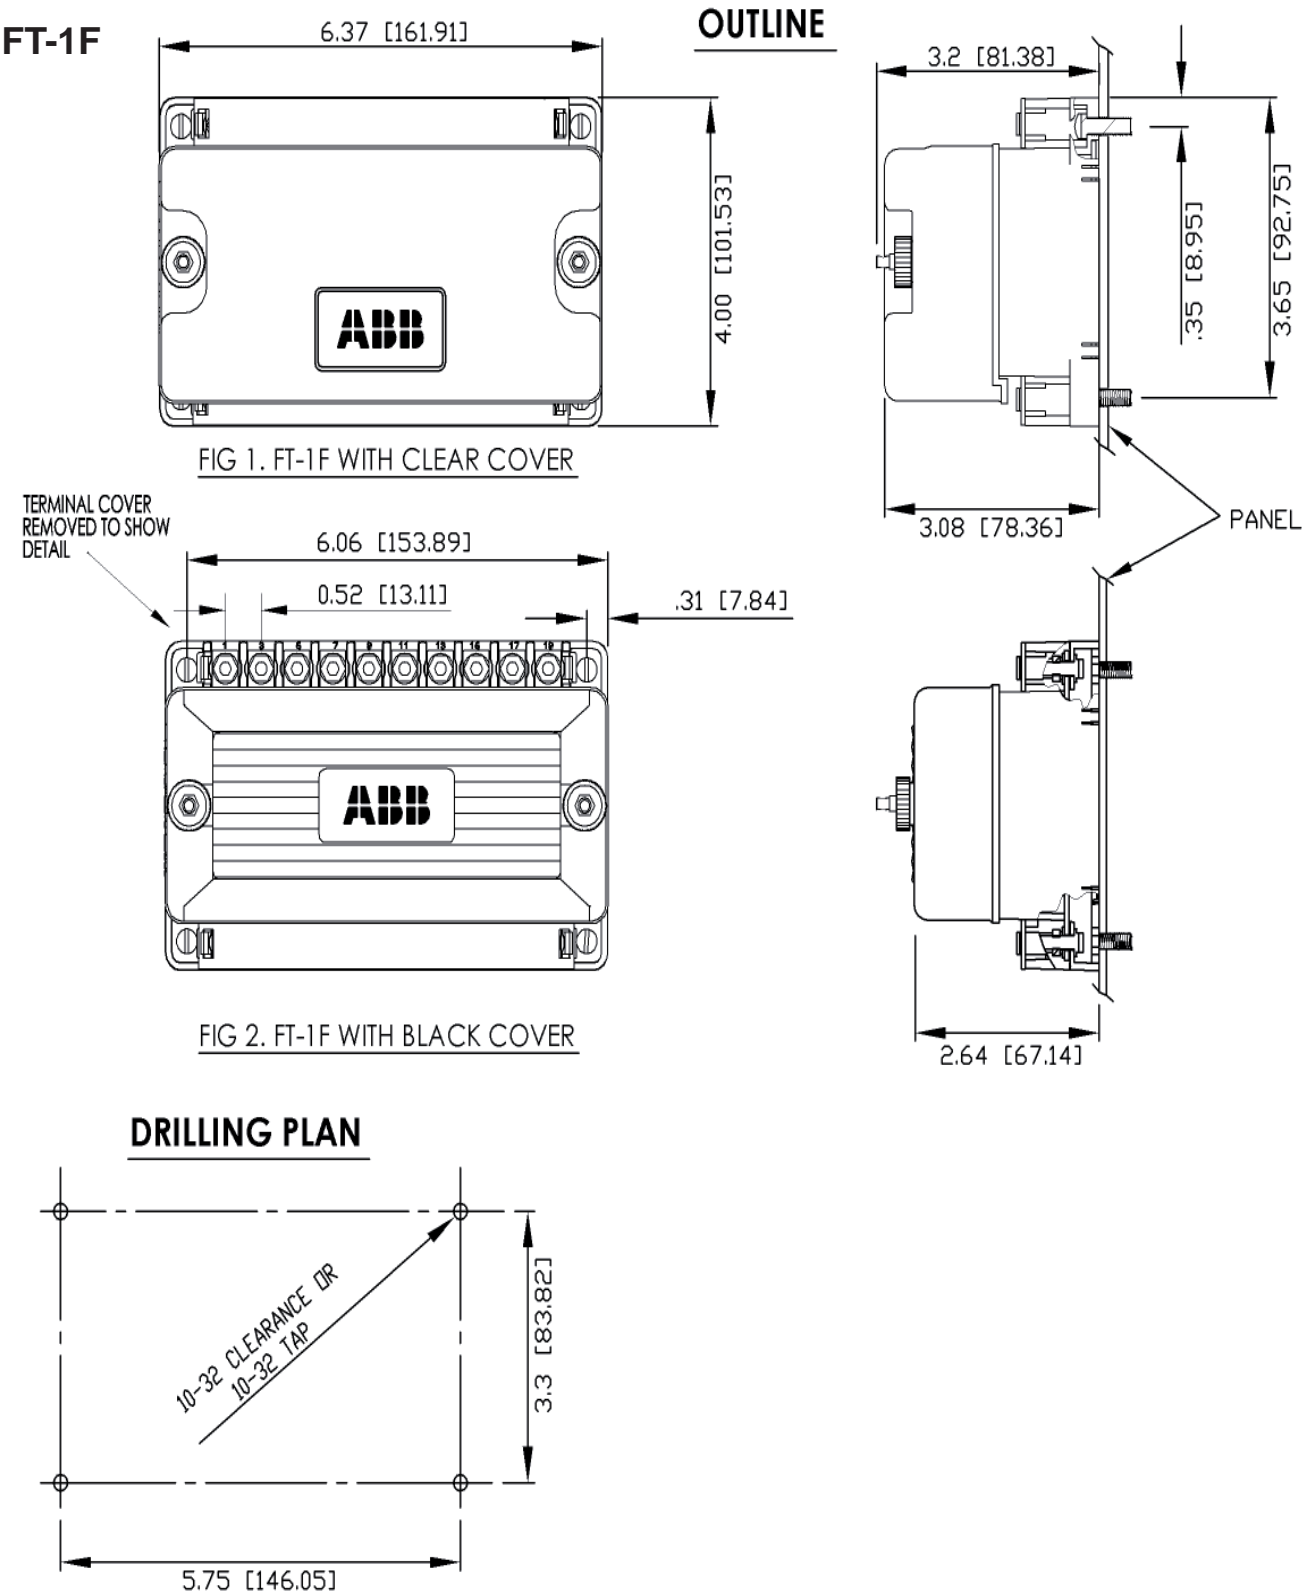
FT-1 and FT-1X switch outline and drilling plan
